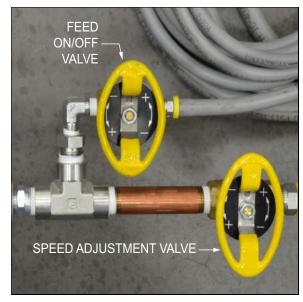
PNEUMATIC POWERED MACHINING VALVES
